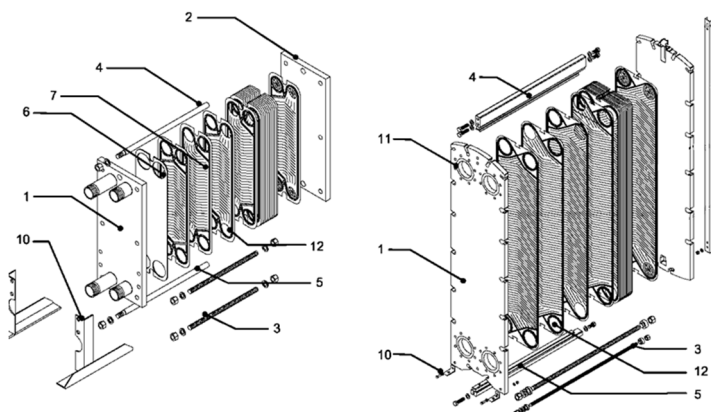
Plate heat exchanger of CIPRIANI company: 1 - fixed (front) panel; 2 - movable (rear) panel; 3 - tightening bolts; 4 - guide / bearing crossbar; 5 - guide crossbar; 6 - plate pack; 7 - plates + gasket; 8 - support column; 9 - roller; 10 - frame foot; 11 - protective coating of the channel; 12 - channel.
